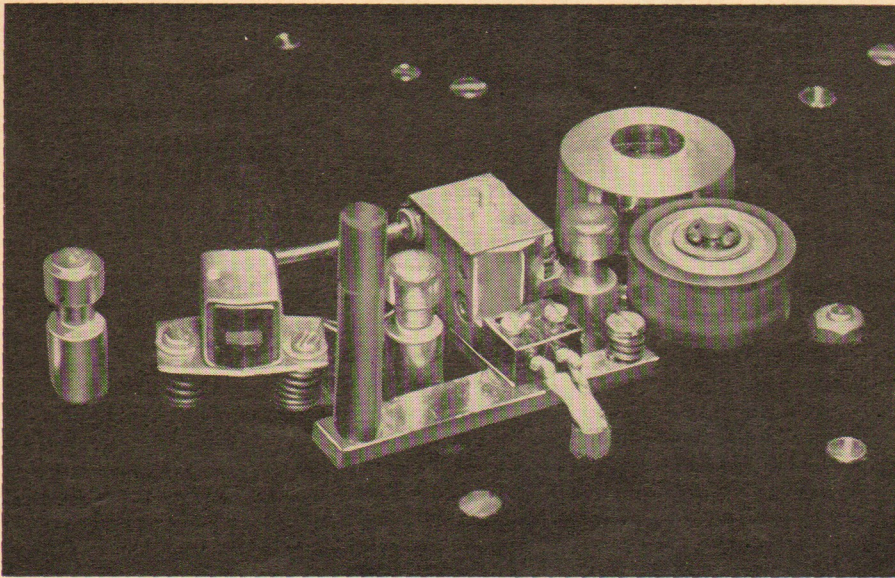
Head and capstan assembly. Audio head is at left, just right of tape guide post. Video head is in two parts (see text); coil part is in front with its shielded-cable connection going through hole in deck. Gap portion is in back (V-wedge-shaped block). Note end of heater resistor behind gap block. Tall post with knurled end in foreground is video head azimuth adjustment.
